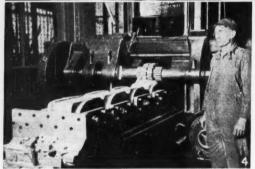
A driving box is bored and faced complete in 30 minutes with this equipment. Fig. 4-Milling rear end main rod brasses. Fig. 5-Planing shoes and wedges on a Cincinnati planer. Note the double toolholders.
